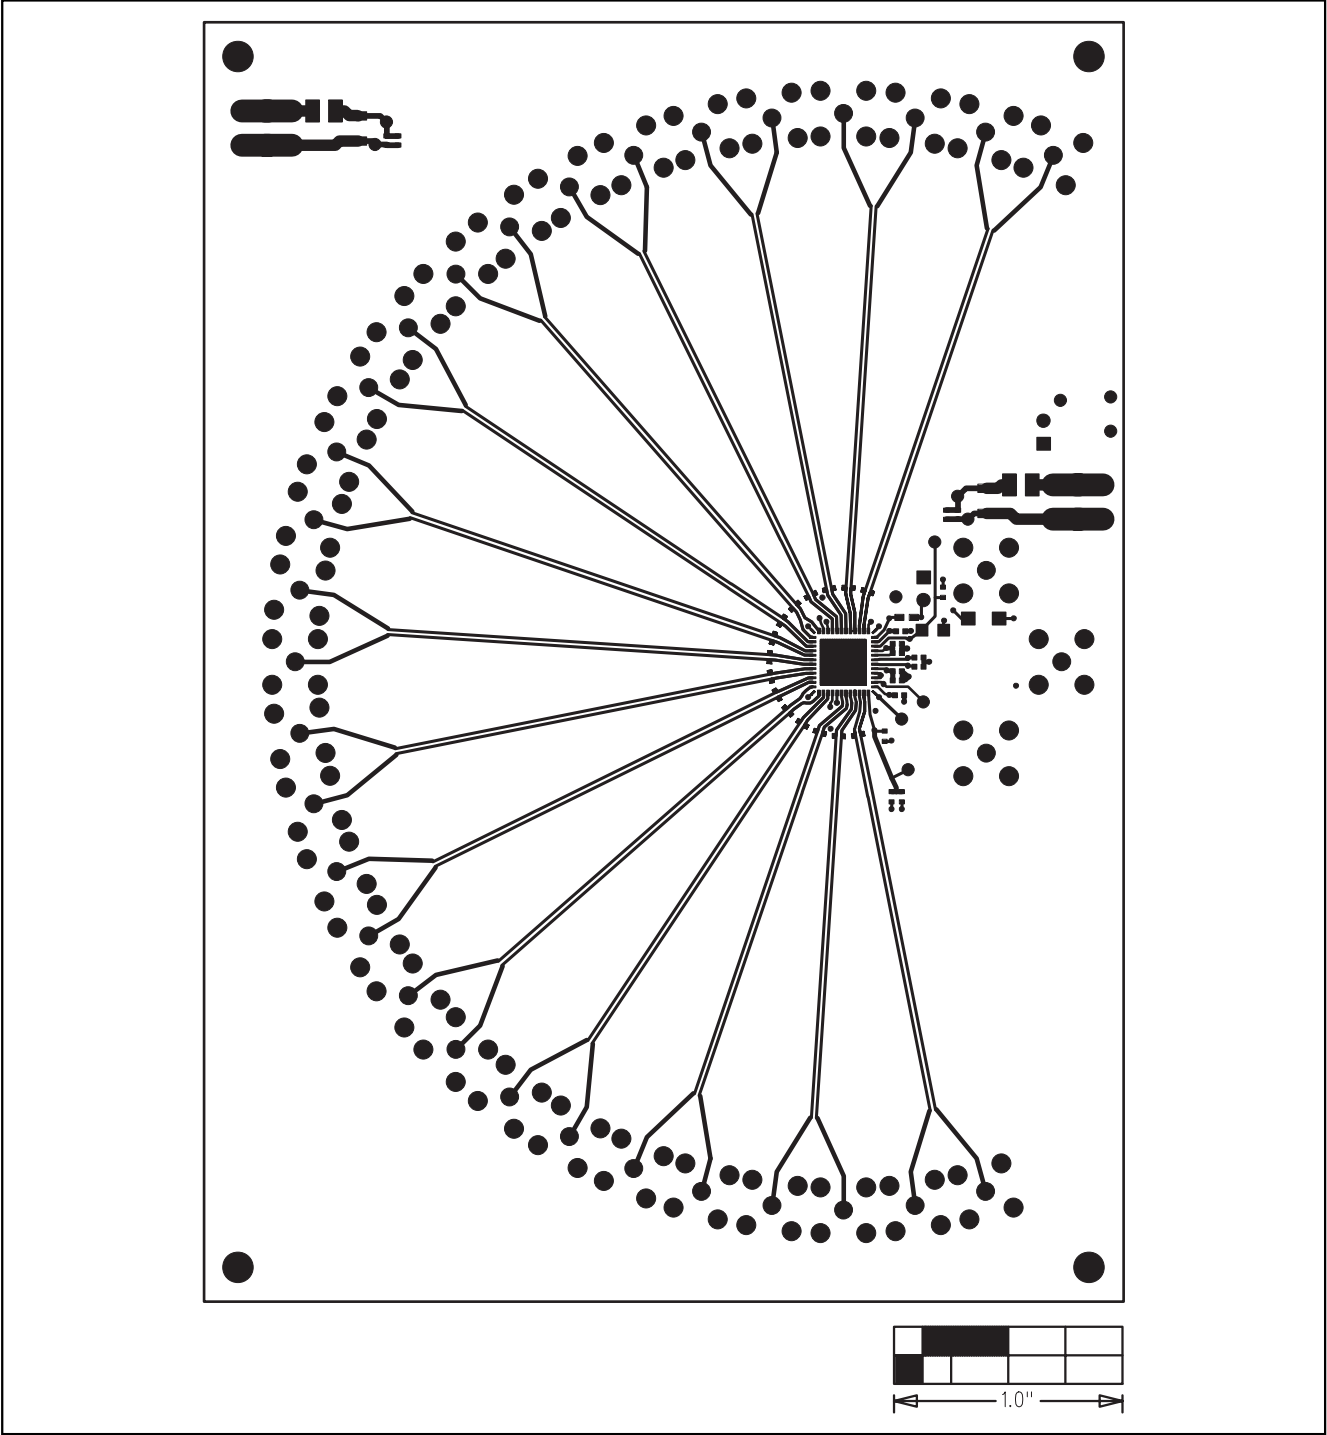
MAX5195 EV Kit PC Board Layout—Component Side
